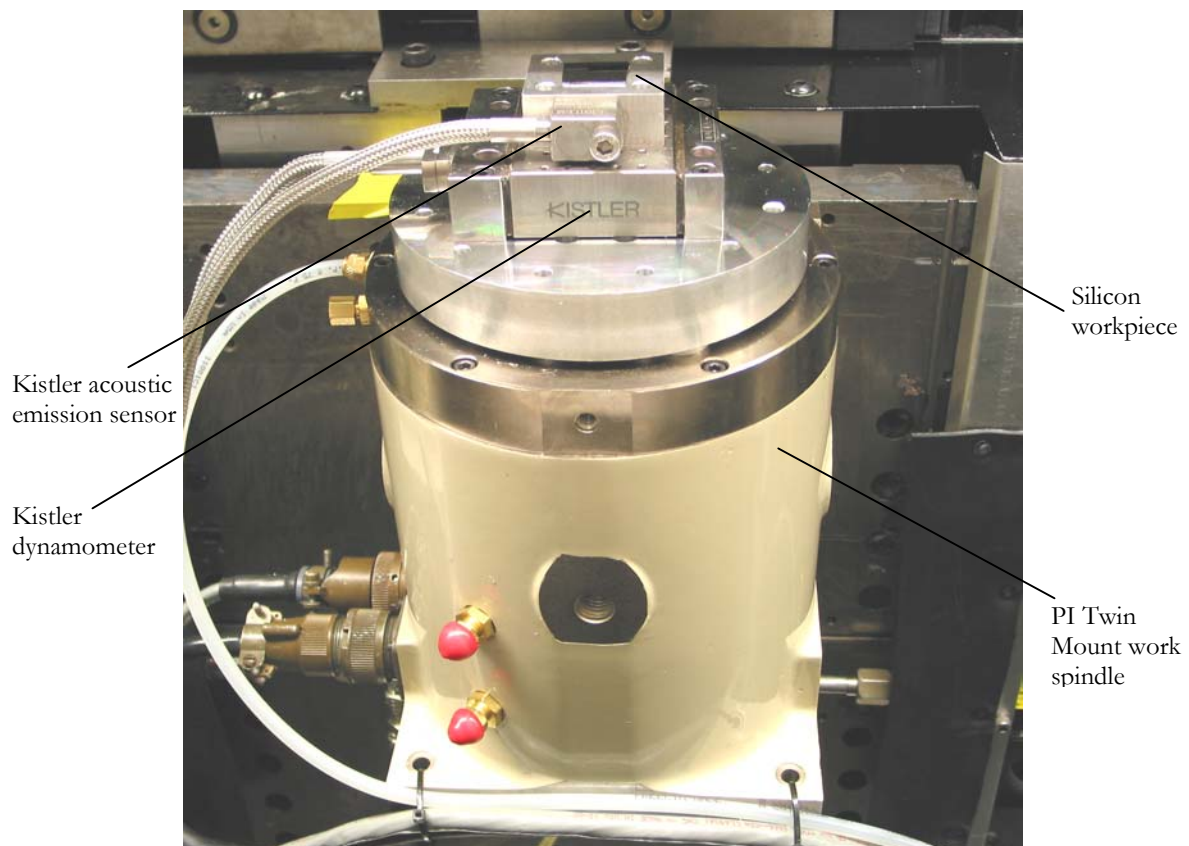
Close-up view of the PI Twin Mount work spindle with Kistler dynamometer, Kistler acoustic emission sensor, chuck, and silicon workpiece.
